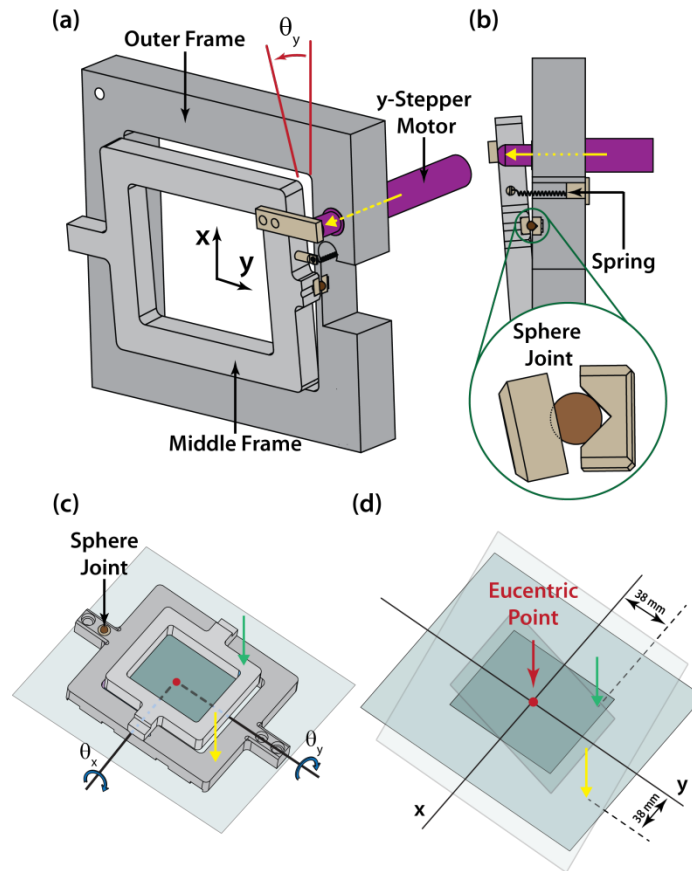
Angular control of the top plane with the custom-built goniometer. (a) isometric view showing how rotation about  $y$  axis is controlled; (b) side view showing the preloaded spring and one of the sphere joints; (c) schematic view of the middle and inner frames and the extended top plane (shaded blue), with arrows showing equivalently where the motors push for the  $x$  (green) and  $y$  (yellow) axes; (d) schematic drawing demonstrating how the location of eucentric point remains unchanged during rotation of the two frames and hence the importance of placing the top plane as close to it as possible. The arm lengths where each stepper applies its equivalent force are also shown.
